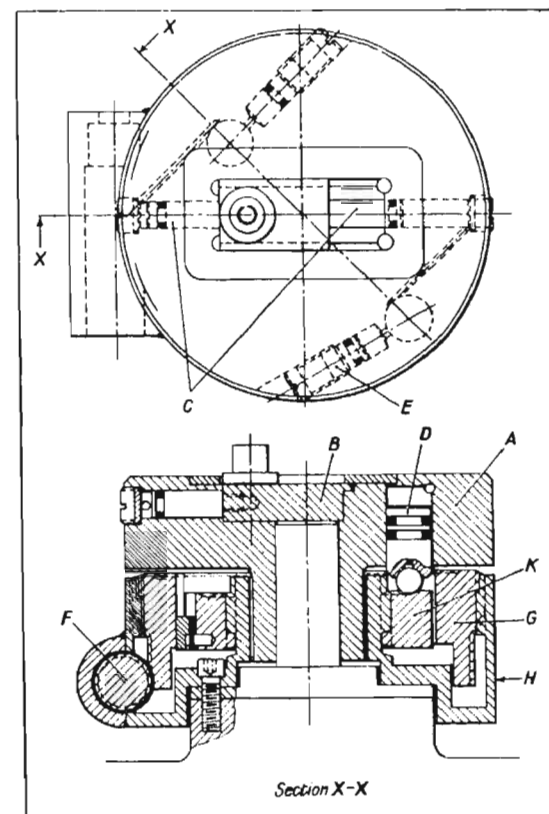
Device for steplessly varying stroke of a reciprocating drive. Stroke can be changed while drive is in motion.
